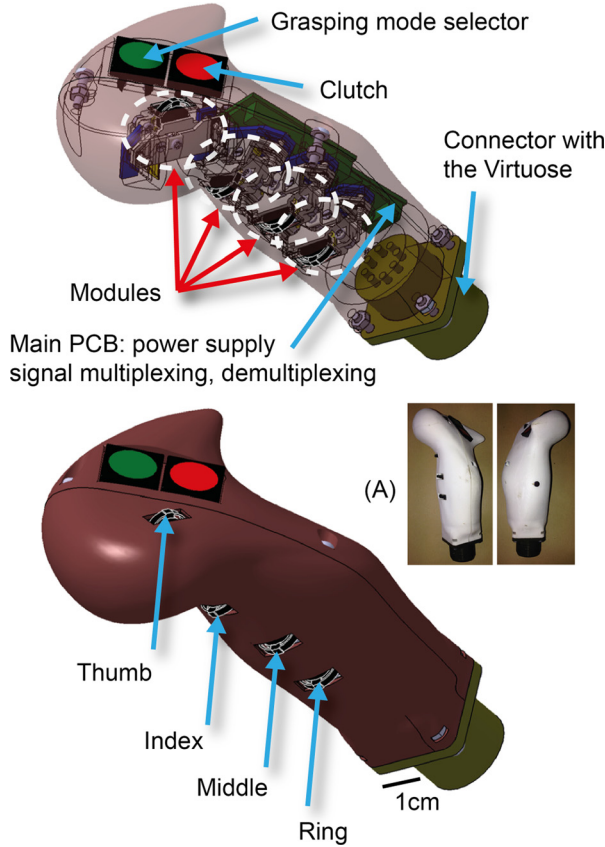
CAD model of the HaptiHand. The top view shows the location of the major subsystems with the outer shell displayed in transparency mode. The bottom view shows the external view of the HaptiHand prototype. (A) Two photos of the physical prototype using opposite viewpoints.
